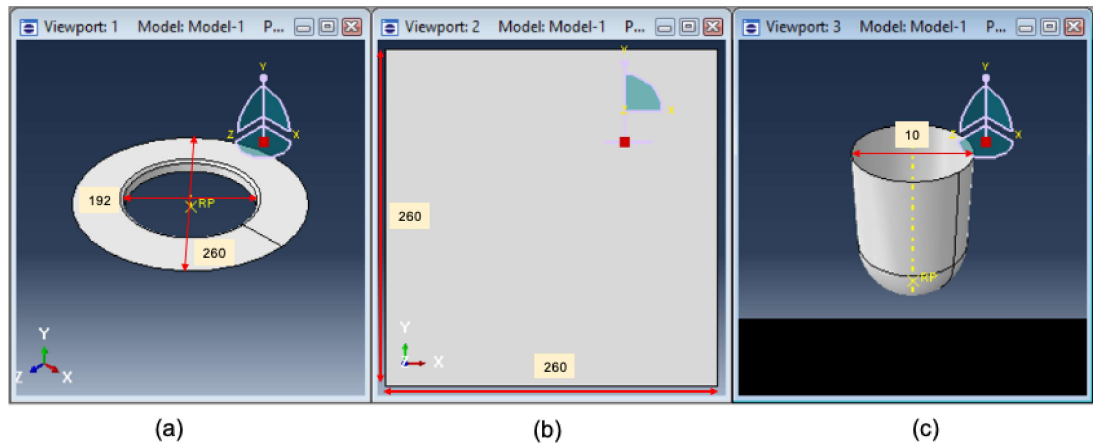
Parts used in ABAQUS V6.13 with dimensions in mm: (a) Tool holder, (b) Sheet, and (c) Forming tool [19].
